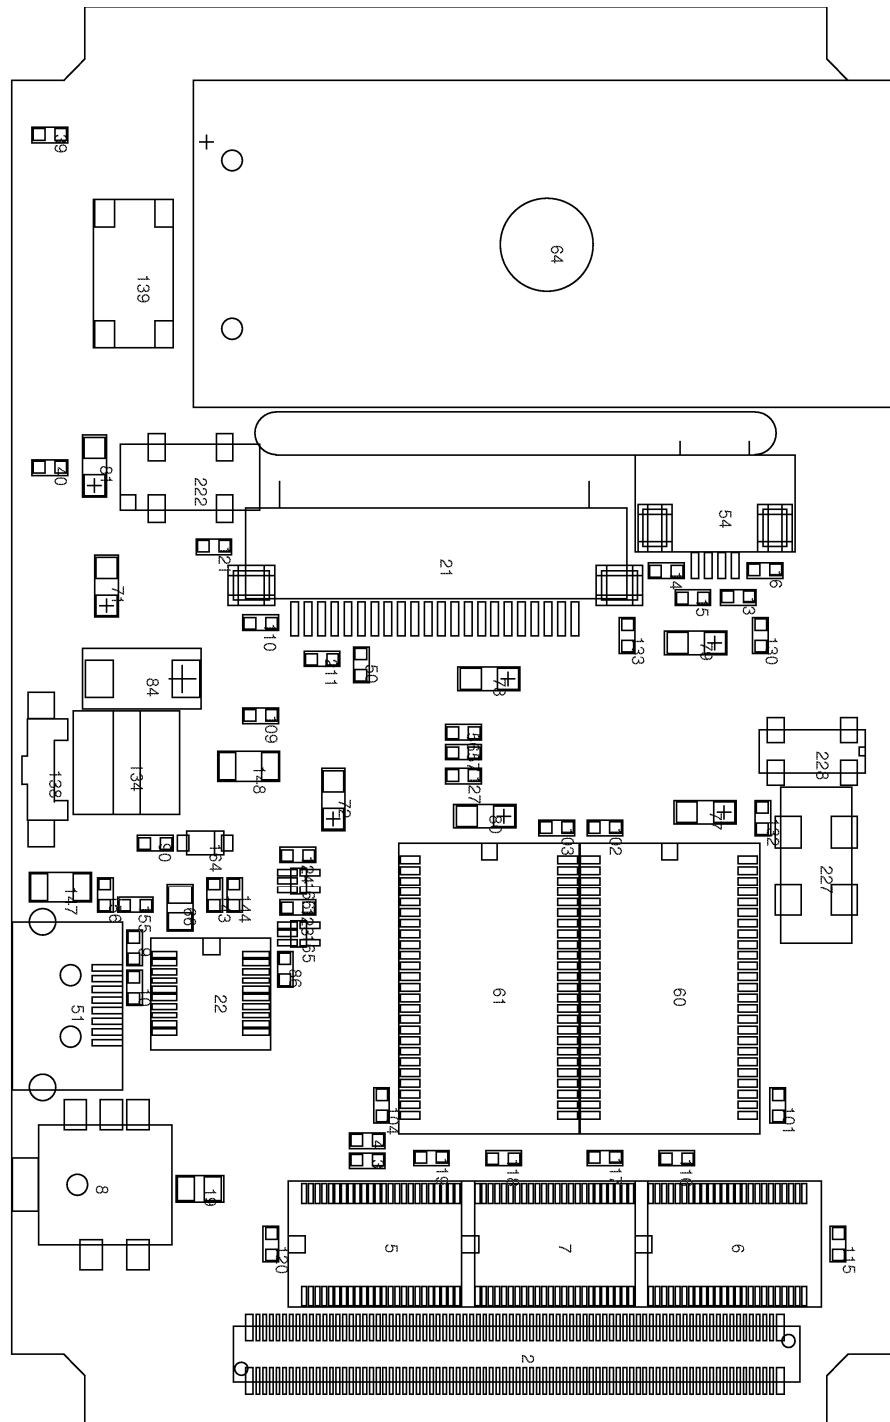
Itsy mother-board version 1.5: bottom-side PCB layout.
